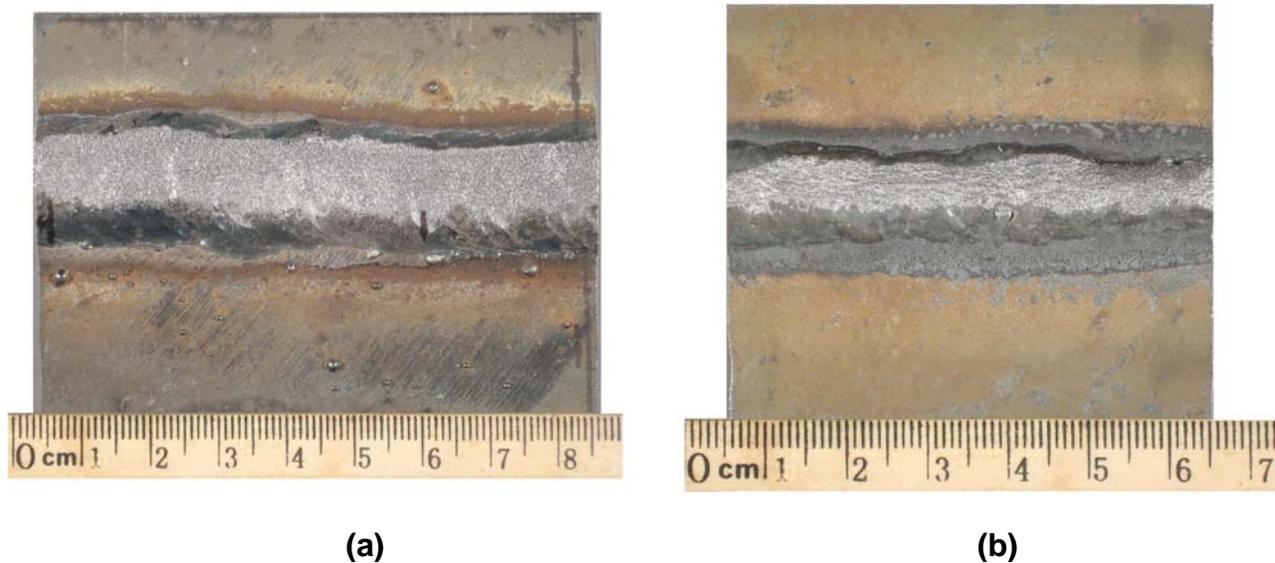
Single-pass profile generated along weld crown of (a) ABS-A welded specimen, and (b) AH-36 welded specimen.
